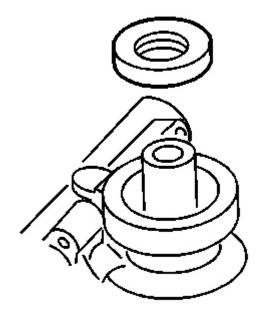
Power Steering Pump Drive Shaft Seal Courtesy of GENERAL MOTORS CORP.
